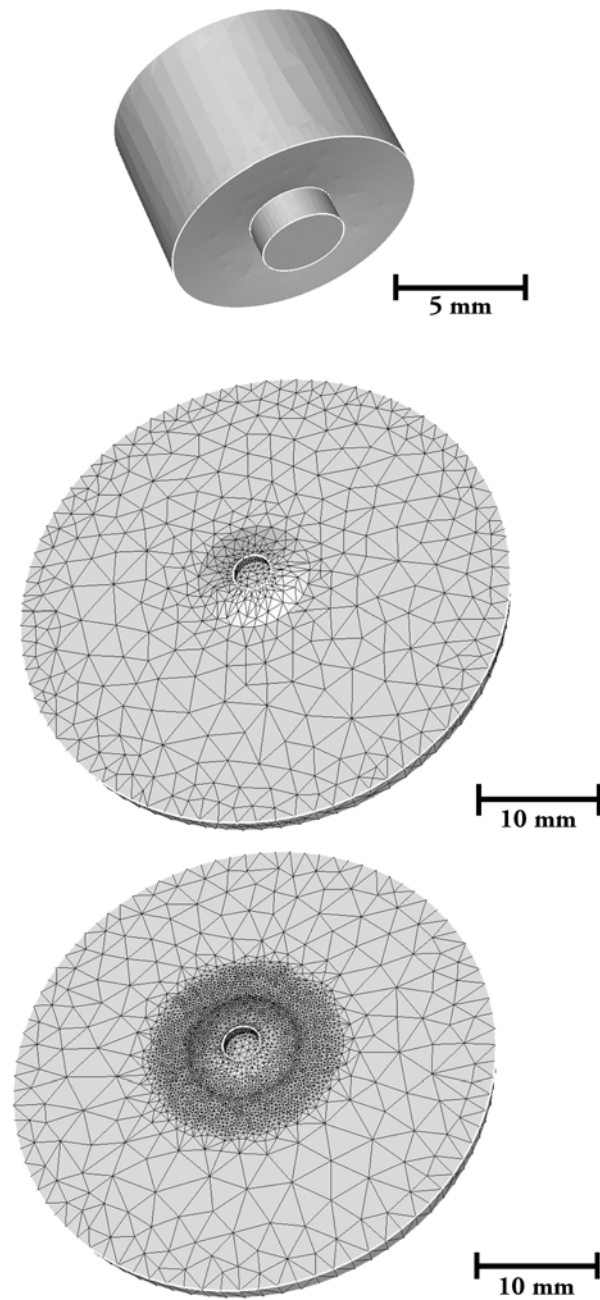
objects; (a) Welding tool; (b) Workpiece (coarse mesh, 6463 elements, 1764 nodes);
